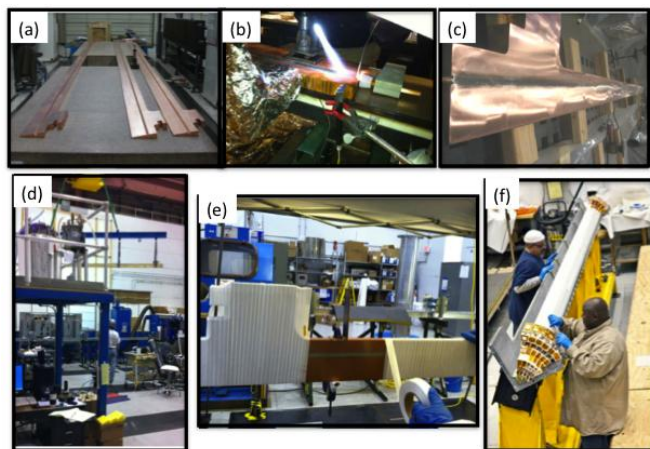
The inner TF bundle manufacturing stages. (a) Machined conductor, (b) Cooling tube being soldered into conductor, (c) Conductor after cooling tube installation and grinding, (d) Conductor being removed from oven after sandblasting and priming, (e) Conductor being wrapped with fiberglass insulation, and (f) Insulated conductor being placed into mold.
